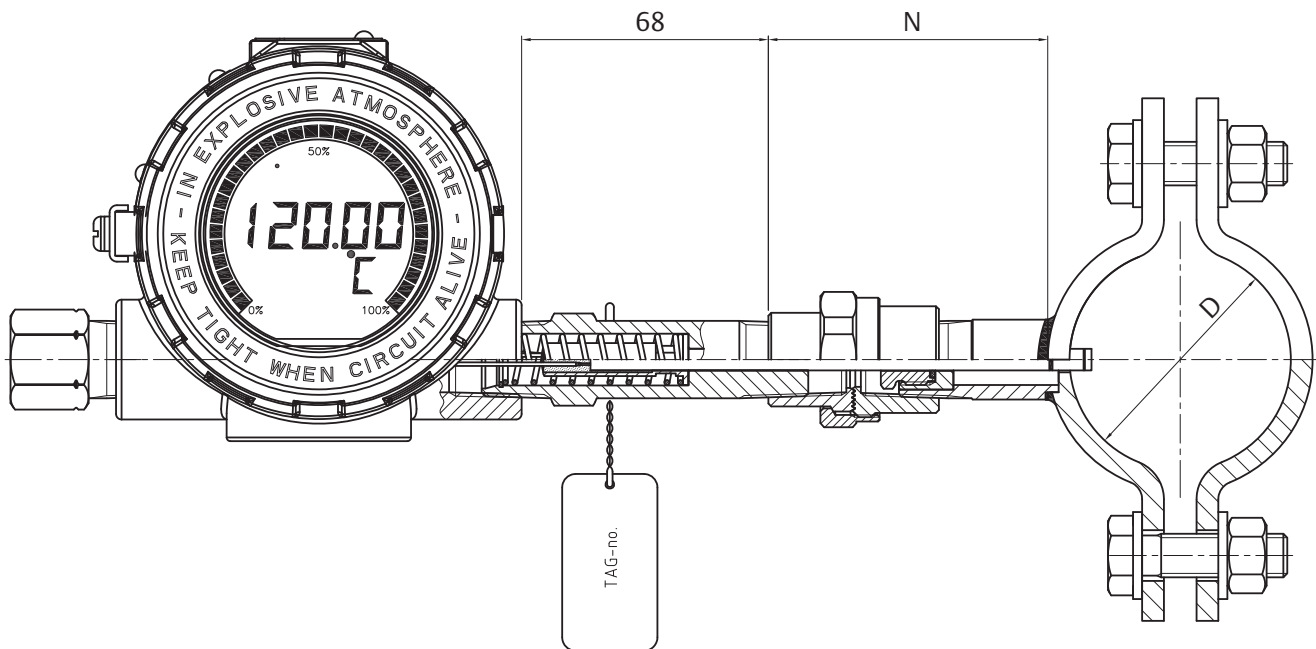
Pipe Clamp Sensor Assembly with Rosemount 3144P
